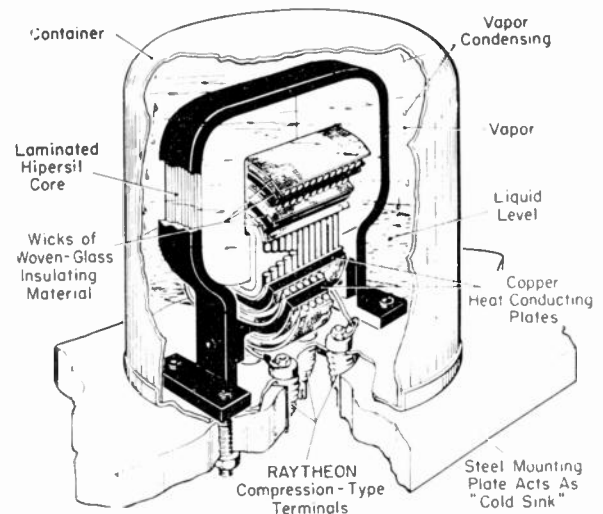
Cutaway view of fluorochemical transformer using evaporative cooling technique.
